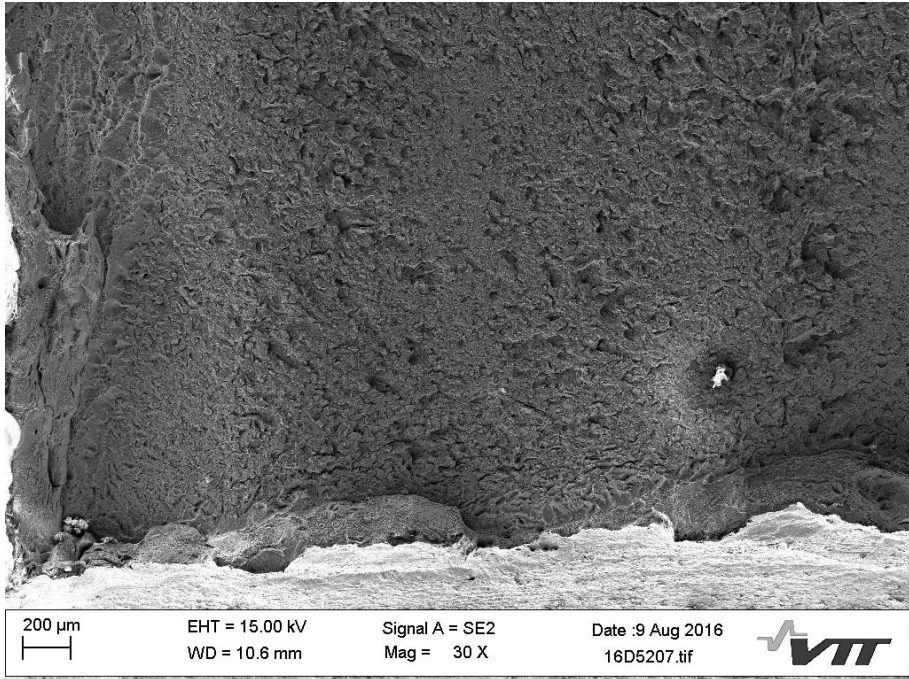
A SEM image of the fracture surface of a brittle Charpy-V specimen, showing the wavy fracture surface appearance, which follows the weld fusion boundary.
